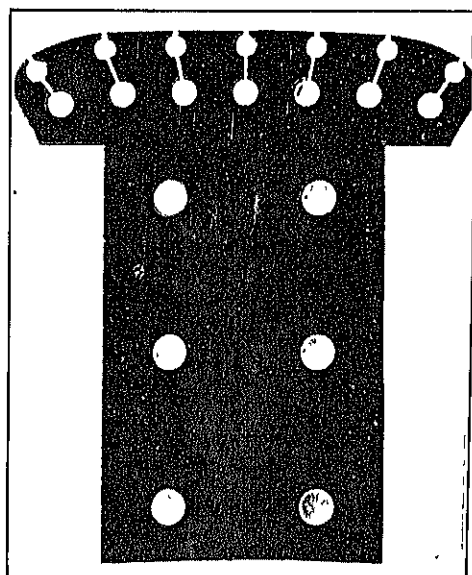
Pole punching for synchronous motor with double-squirrel-cage starting winding.
